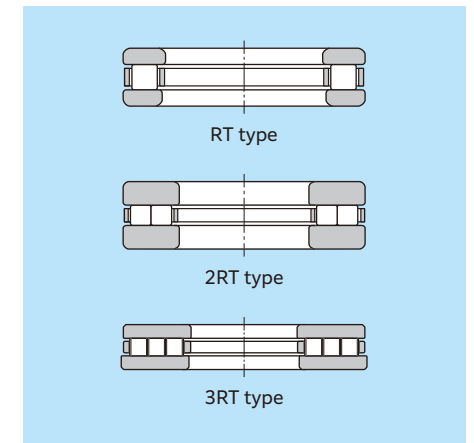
Thrust cylindrical roller bearings (examples of machined cage)
